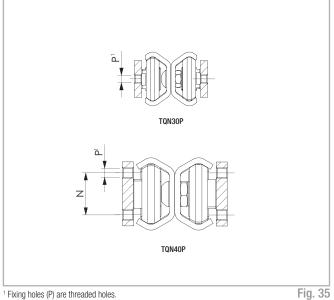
<sup>1</sup> Fixing holes (P) are threaded holes.
